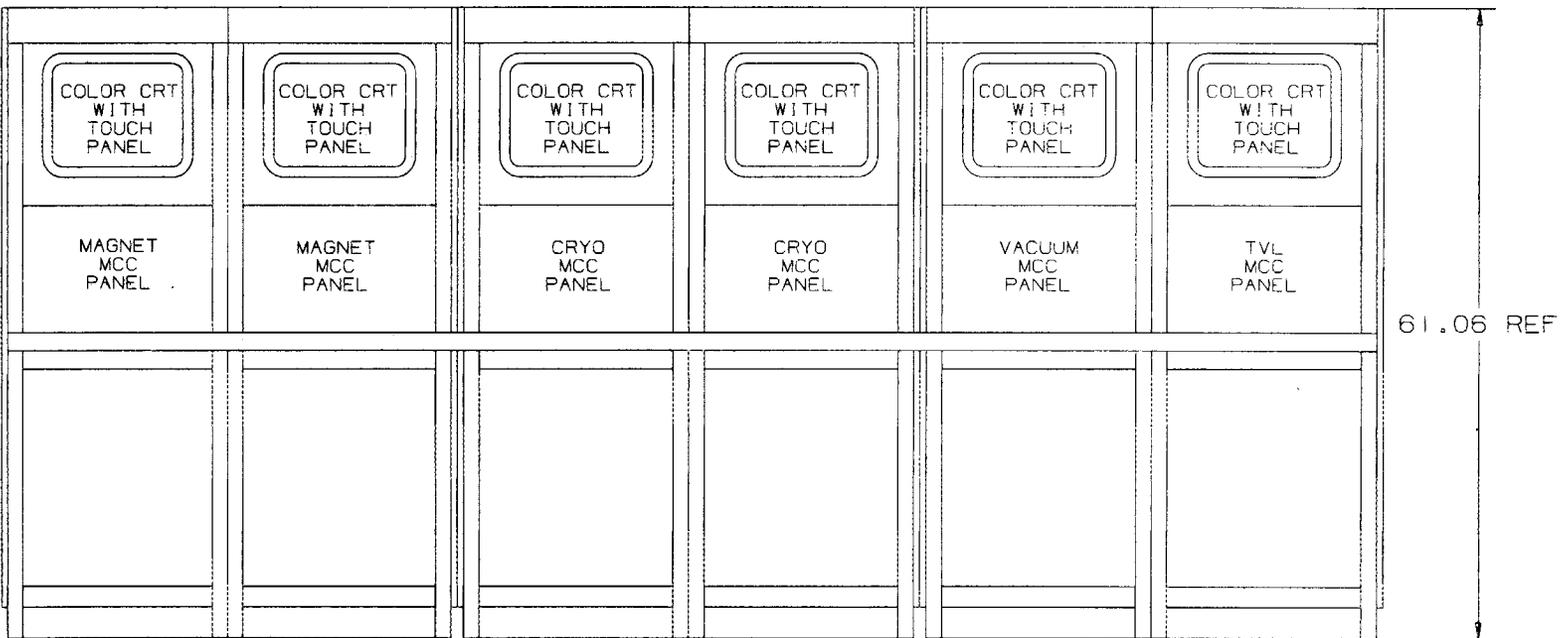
MCC STATION LAYOUT (TYPICAL)
